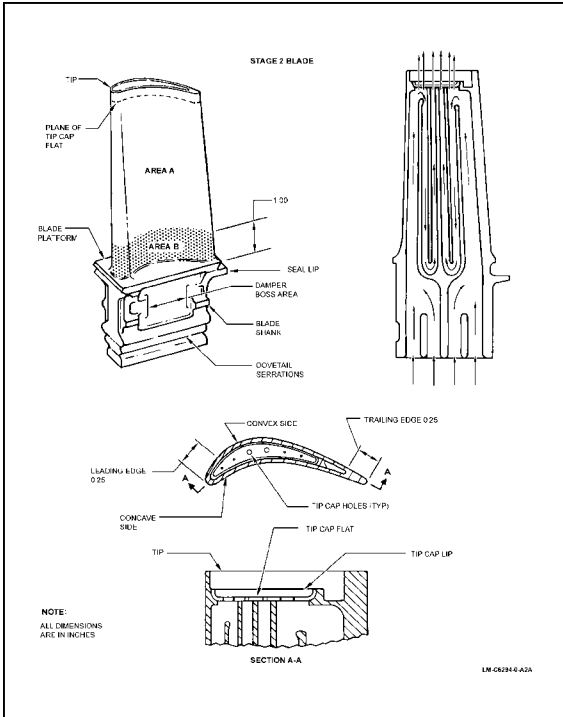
High Pressure Turbine Rotor Stage 2 Blade (Single Shank)
